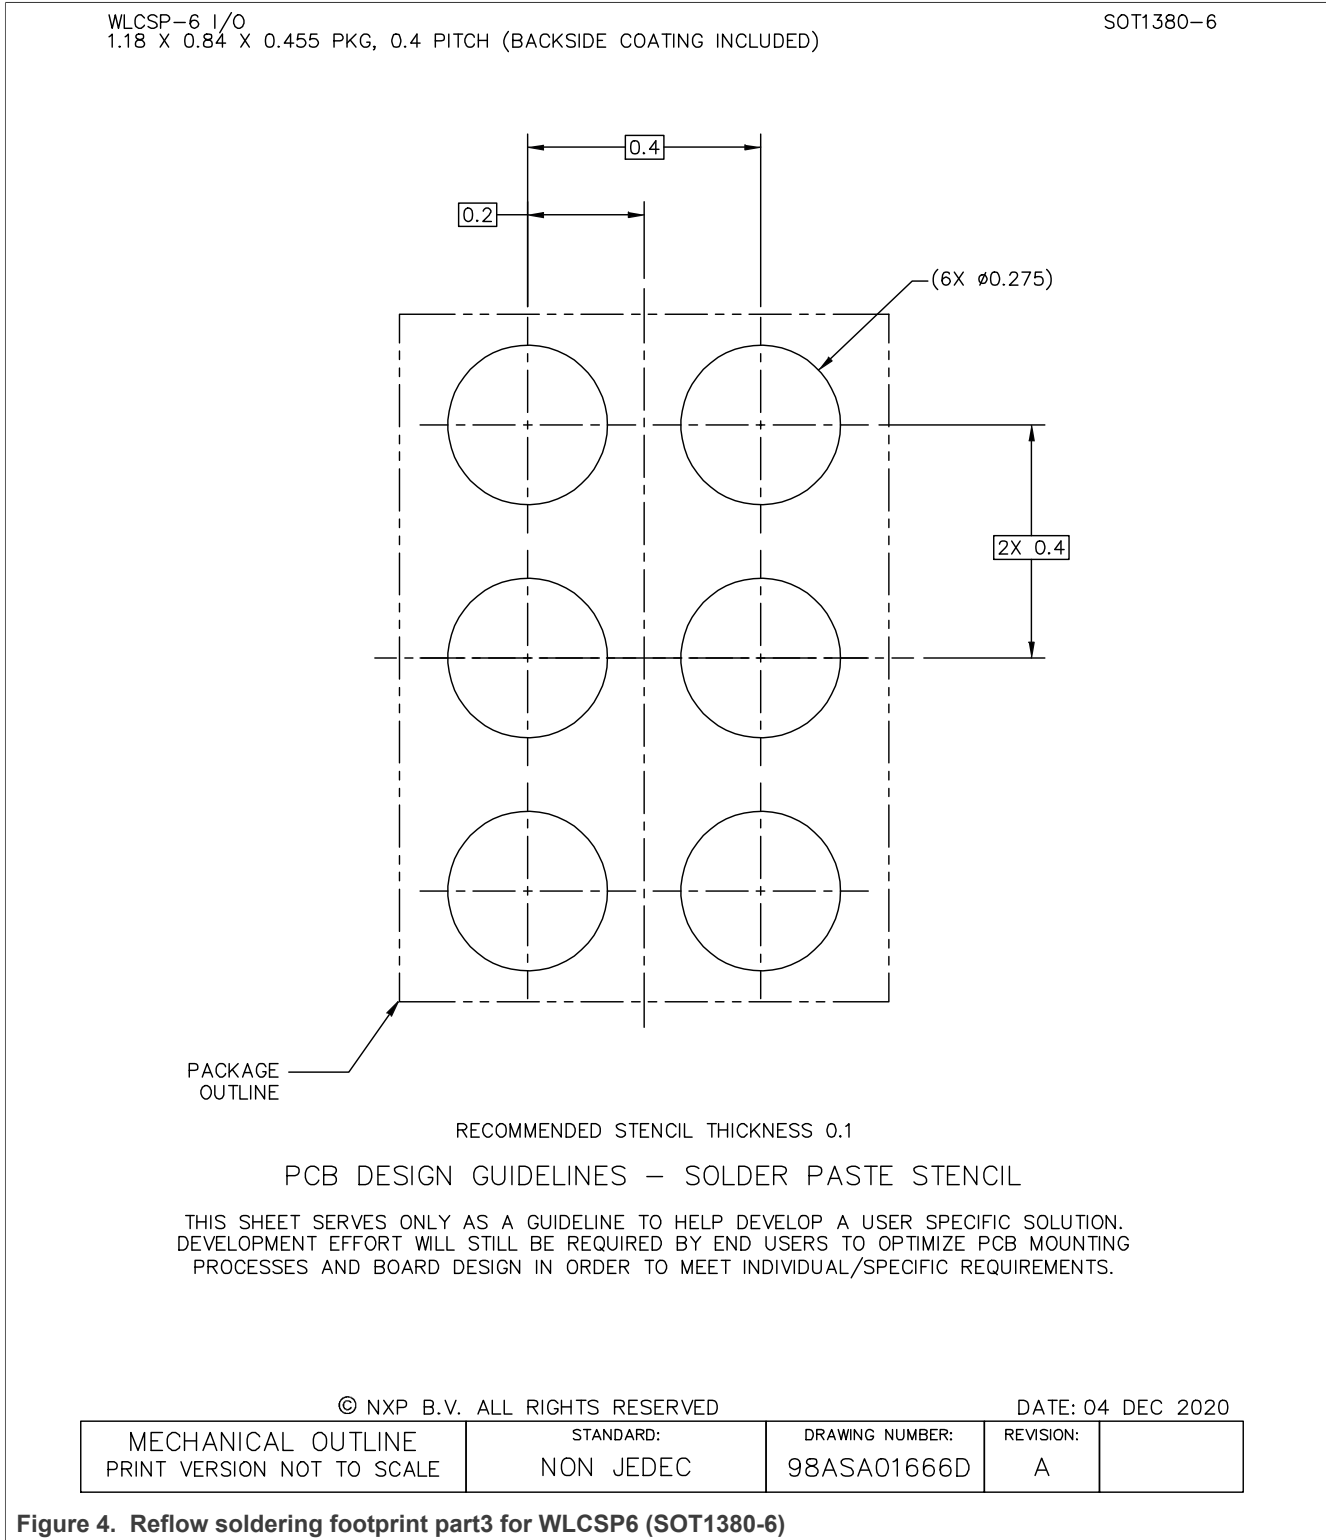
Reflow soldering footprint part3 for WLCSP6 (SOT1380-6)
